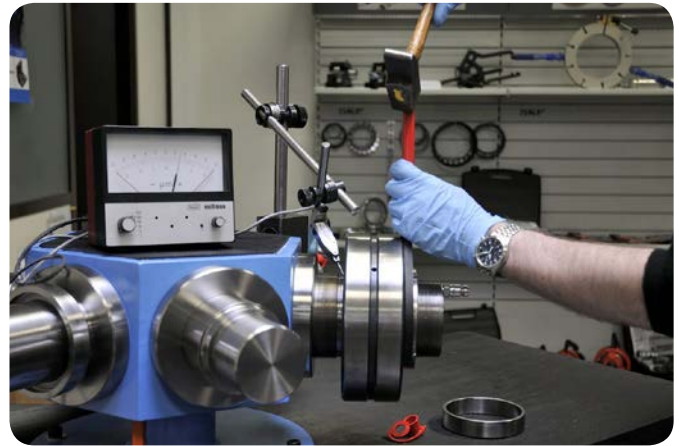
Bearing position with the nut and hammer plus sound method once the sound becomes more metallic
